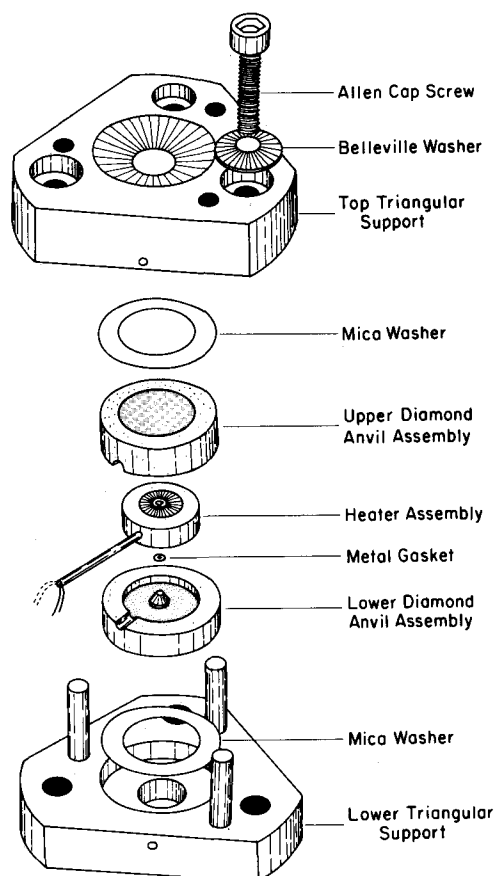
Exploded view of the *PT* cell assembly. Pyrophyllite components are stippled. See also Figs. 1-3.
